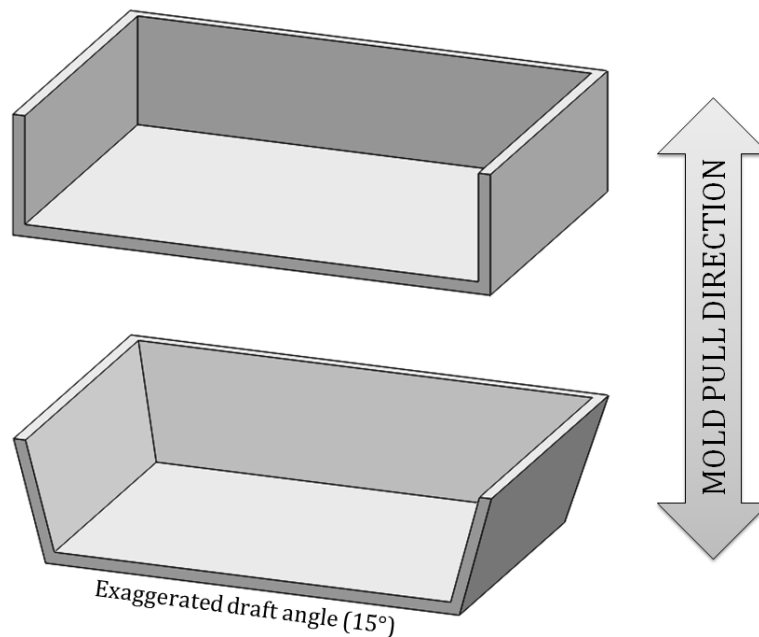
Top image is an example of a part lacking draft and improperly designed; bottom image shows part with draft angles included.
